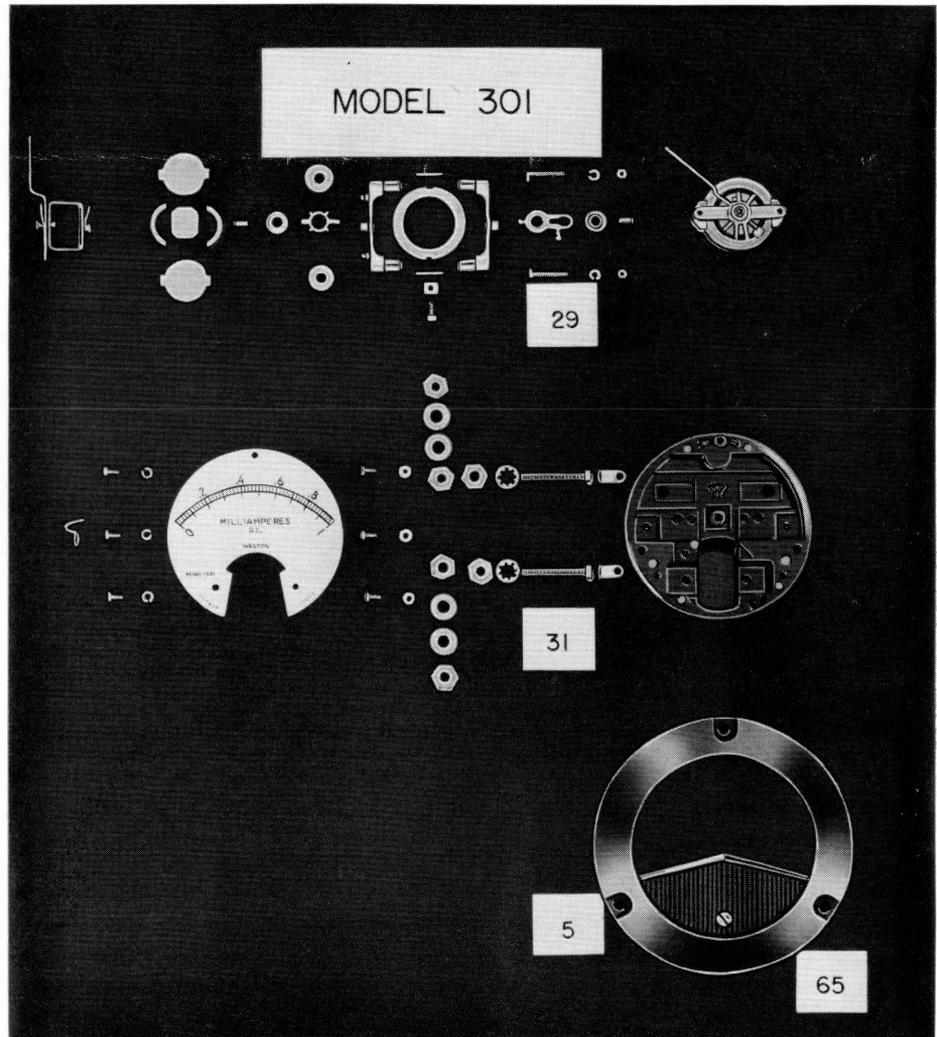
Exploded view of Weston Model 301 mechanism and housing.
